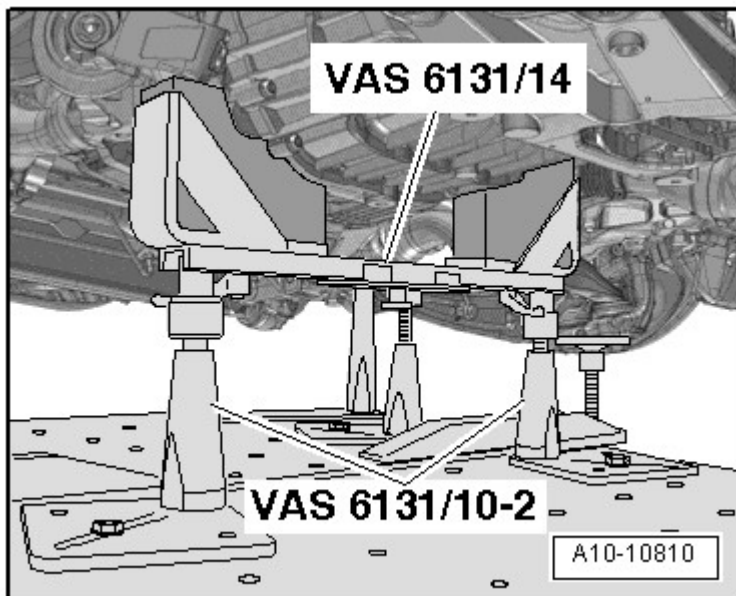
Attaching Mounting Elements From Support Set For Audi VAS 6131/10
